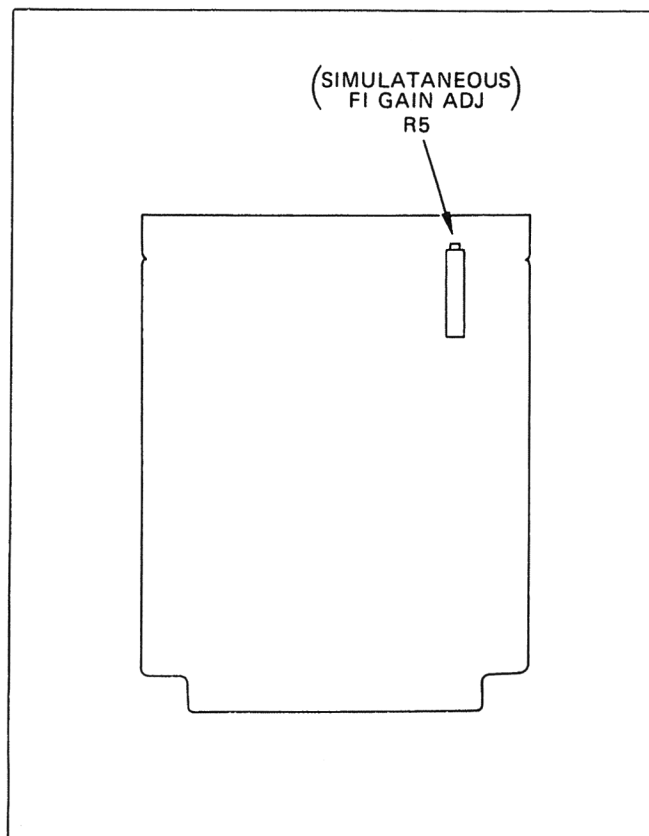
Trimmer Locations, Remote Function Selector Assembly, A25
